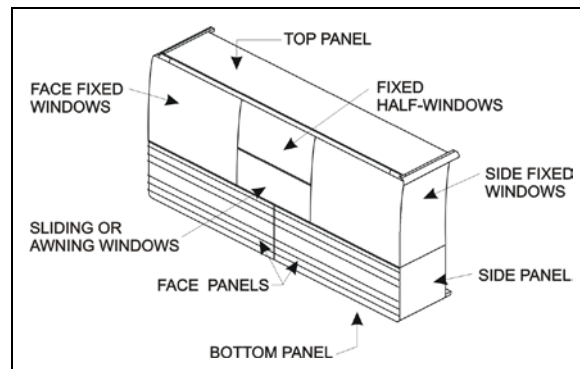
SLIDE-OUT PANELS AND WINDOWS
